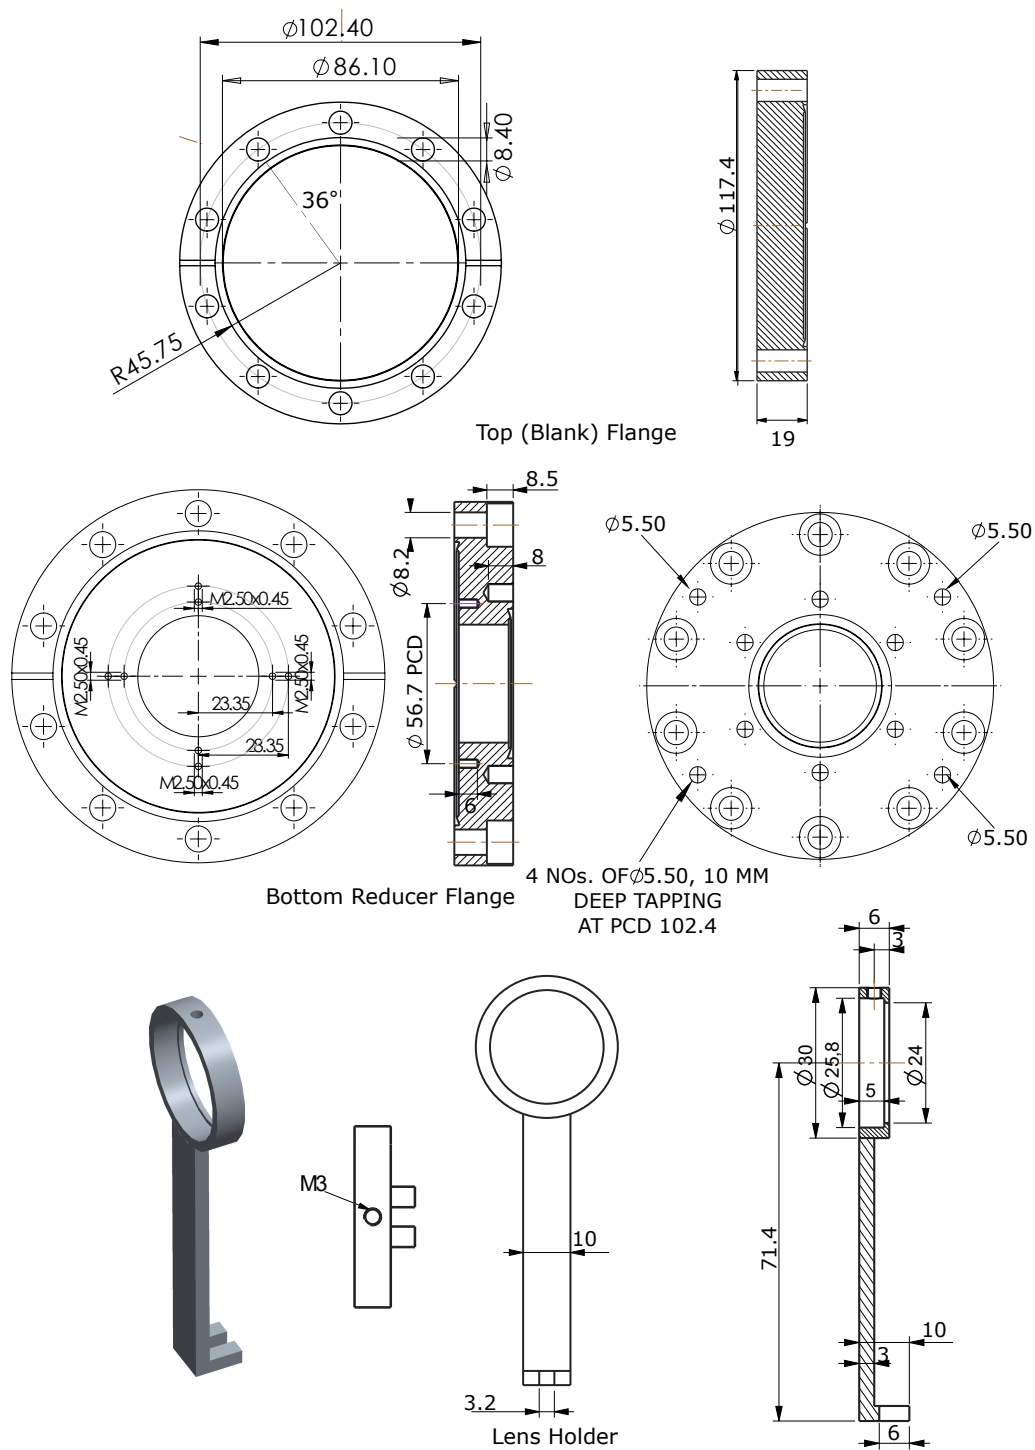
Dimensional drawing different parts of UHV chamber assembly. All the dimensions of length are in units of millimeter and the angles are in degree.
